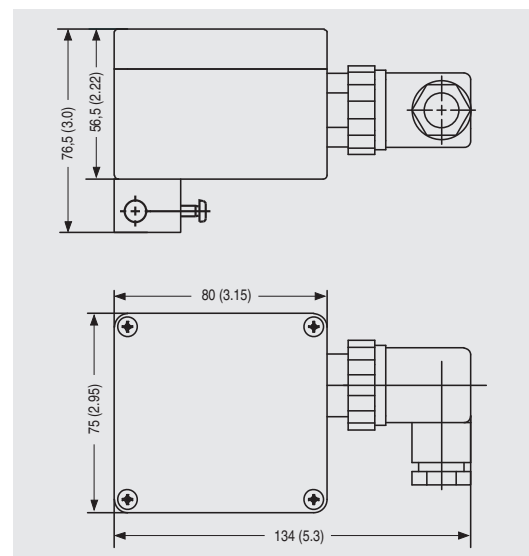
Changeover contact K23, dimensions in mm (inch)
